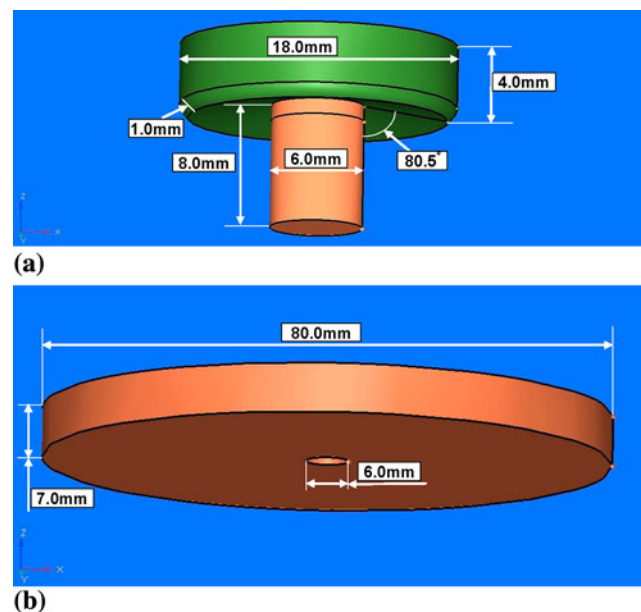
Geometrical models with dimensions for the (a) FSW tool and (b) FSW work-piece
